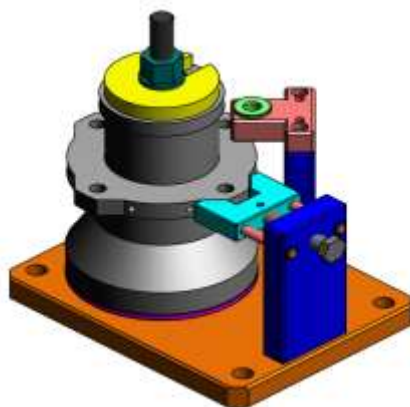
3<sup>rd</sup> Fixture for 4<sup>th</sup> axis VMC
